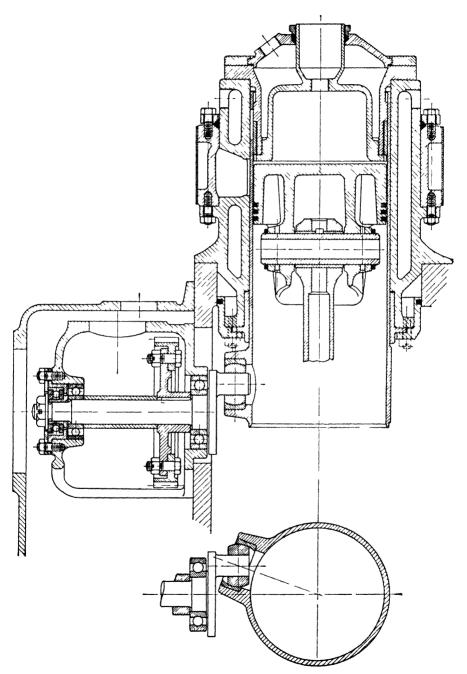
Experimental single sleeve-valve engine E30, bore 5½ in., stroke 7 in.
